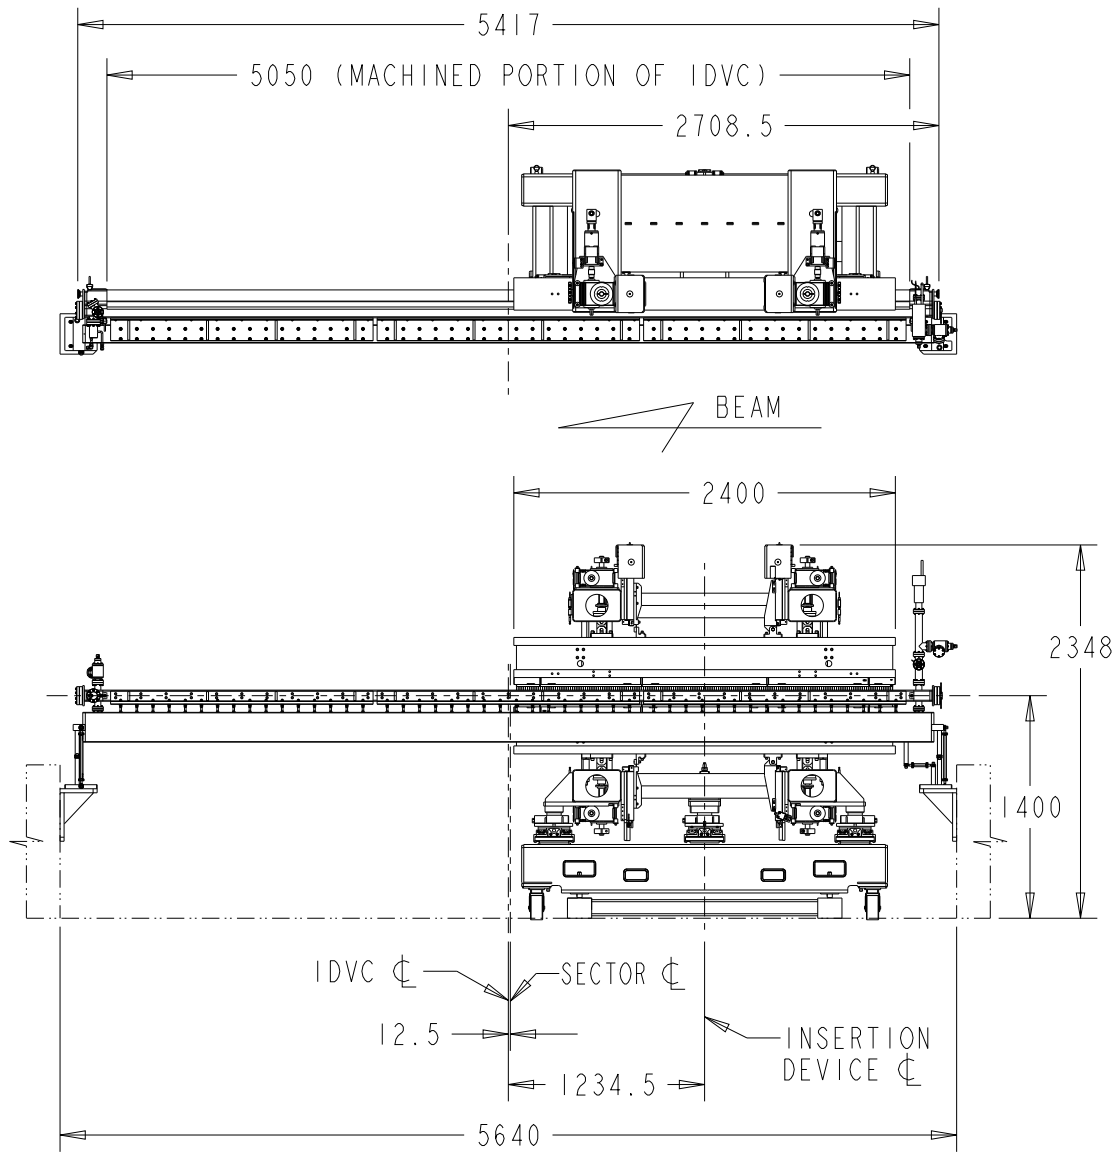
Plan and elevation views of the new straight section with one undulator in the upstream half of the straight section in the APS-U storage ring
